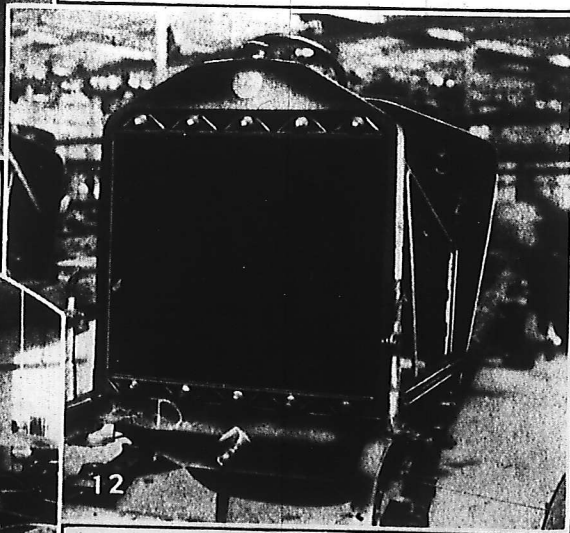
Radiator cores assembled in the shell, or frame. This sectional construction is particularly convenient when repairs are necessary
